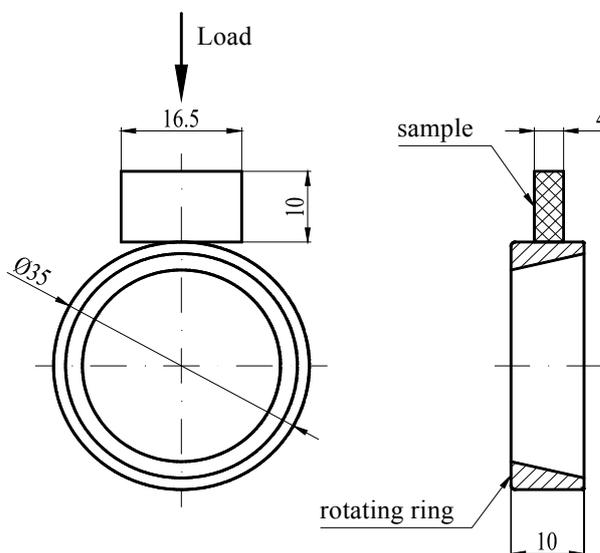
The shapes and dimensions of the friction couple block-on-ring.
